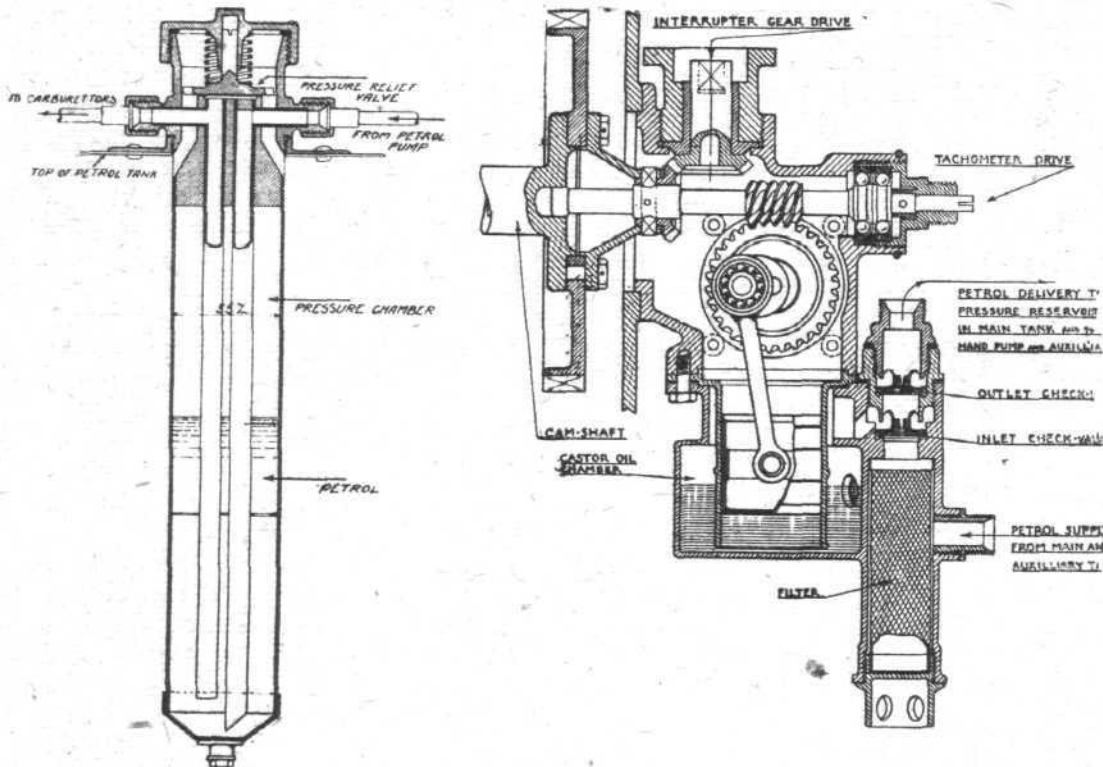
Arrangement of petrol pump and section through pressure reservoir.
